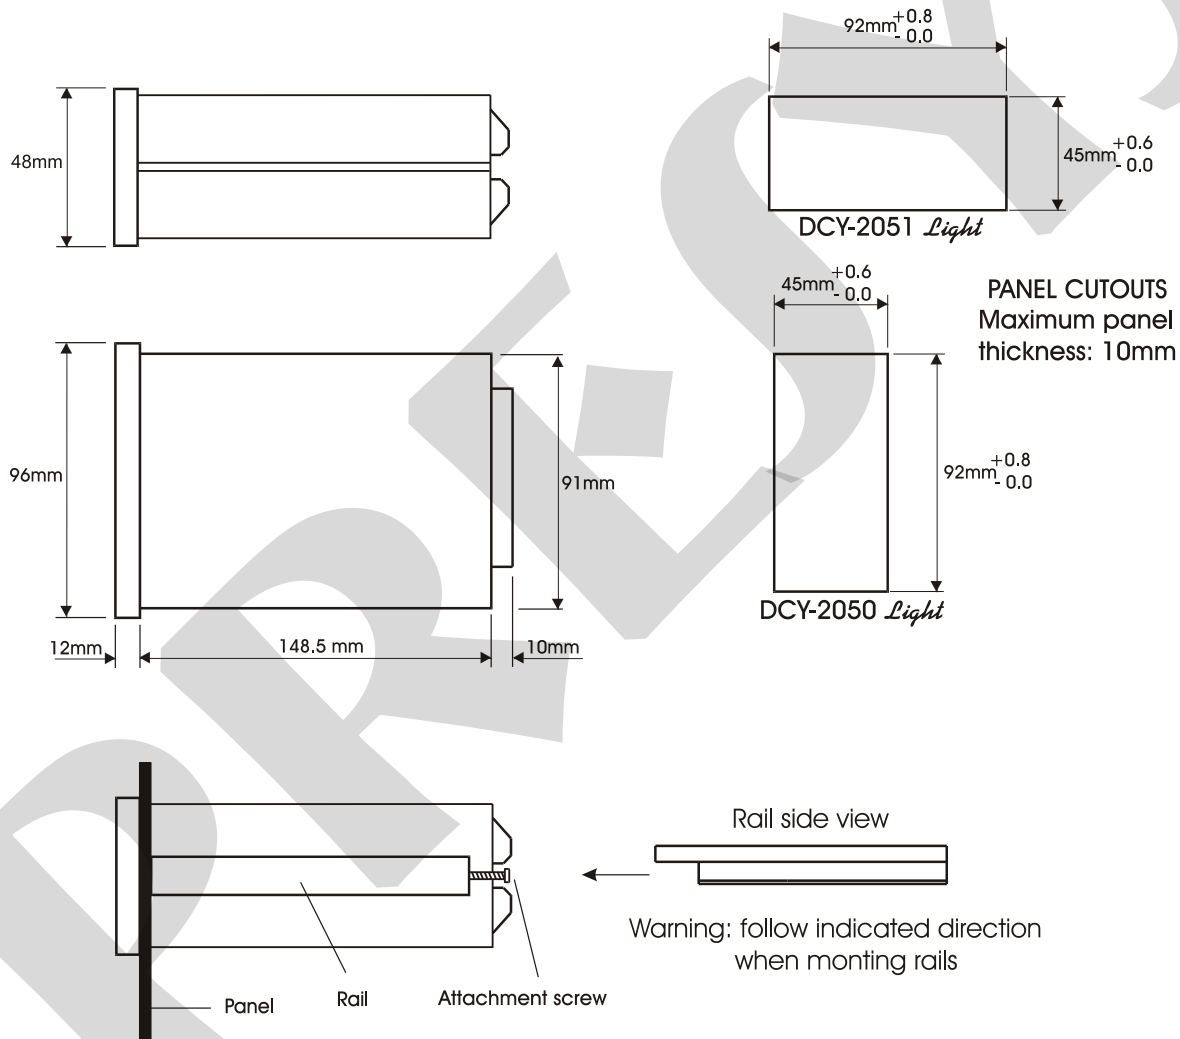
Dimensional drawing, panel mounting cutout and side view for DCY-2050/2051 *Light* controllers
